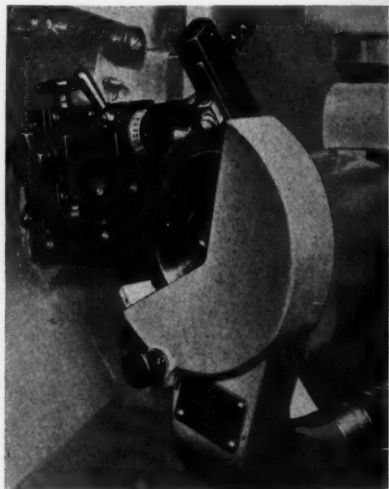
View of wheel spindle with wheel slide, circular guides for angular adjustment, and wheel truing device.
